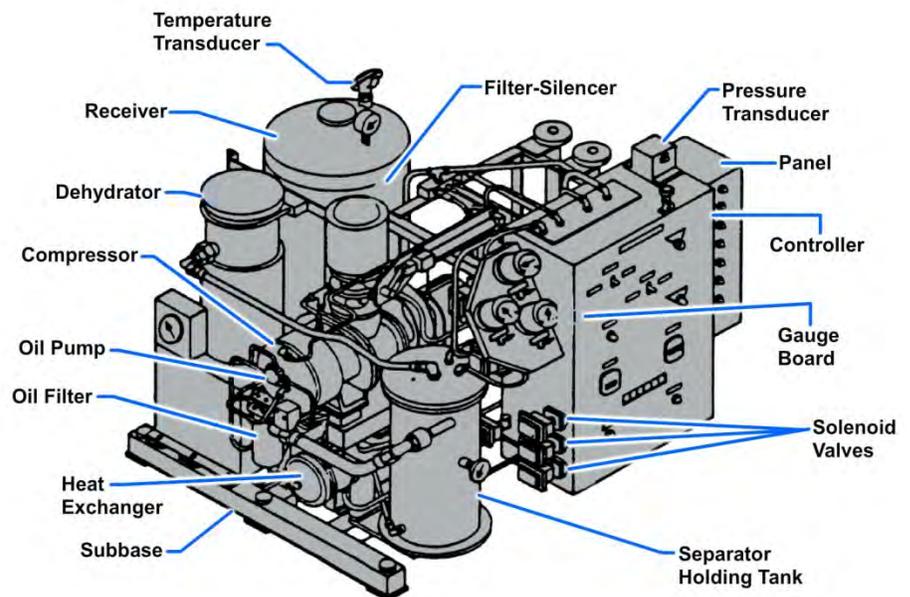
Low pressure, oil-free rotary helical screw compressor.
